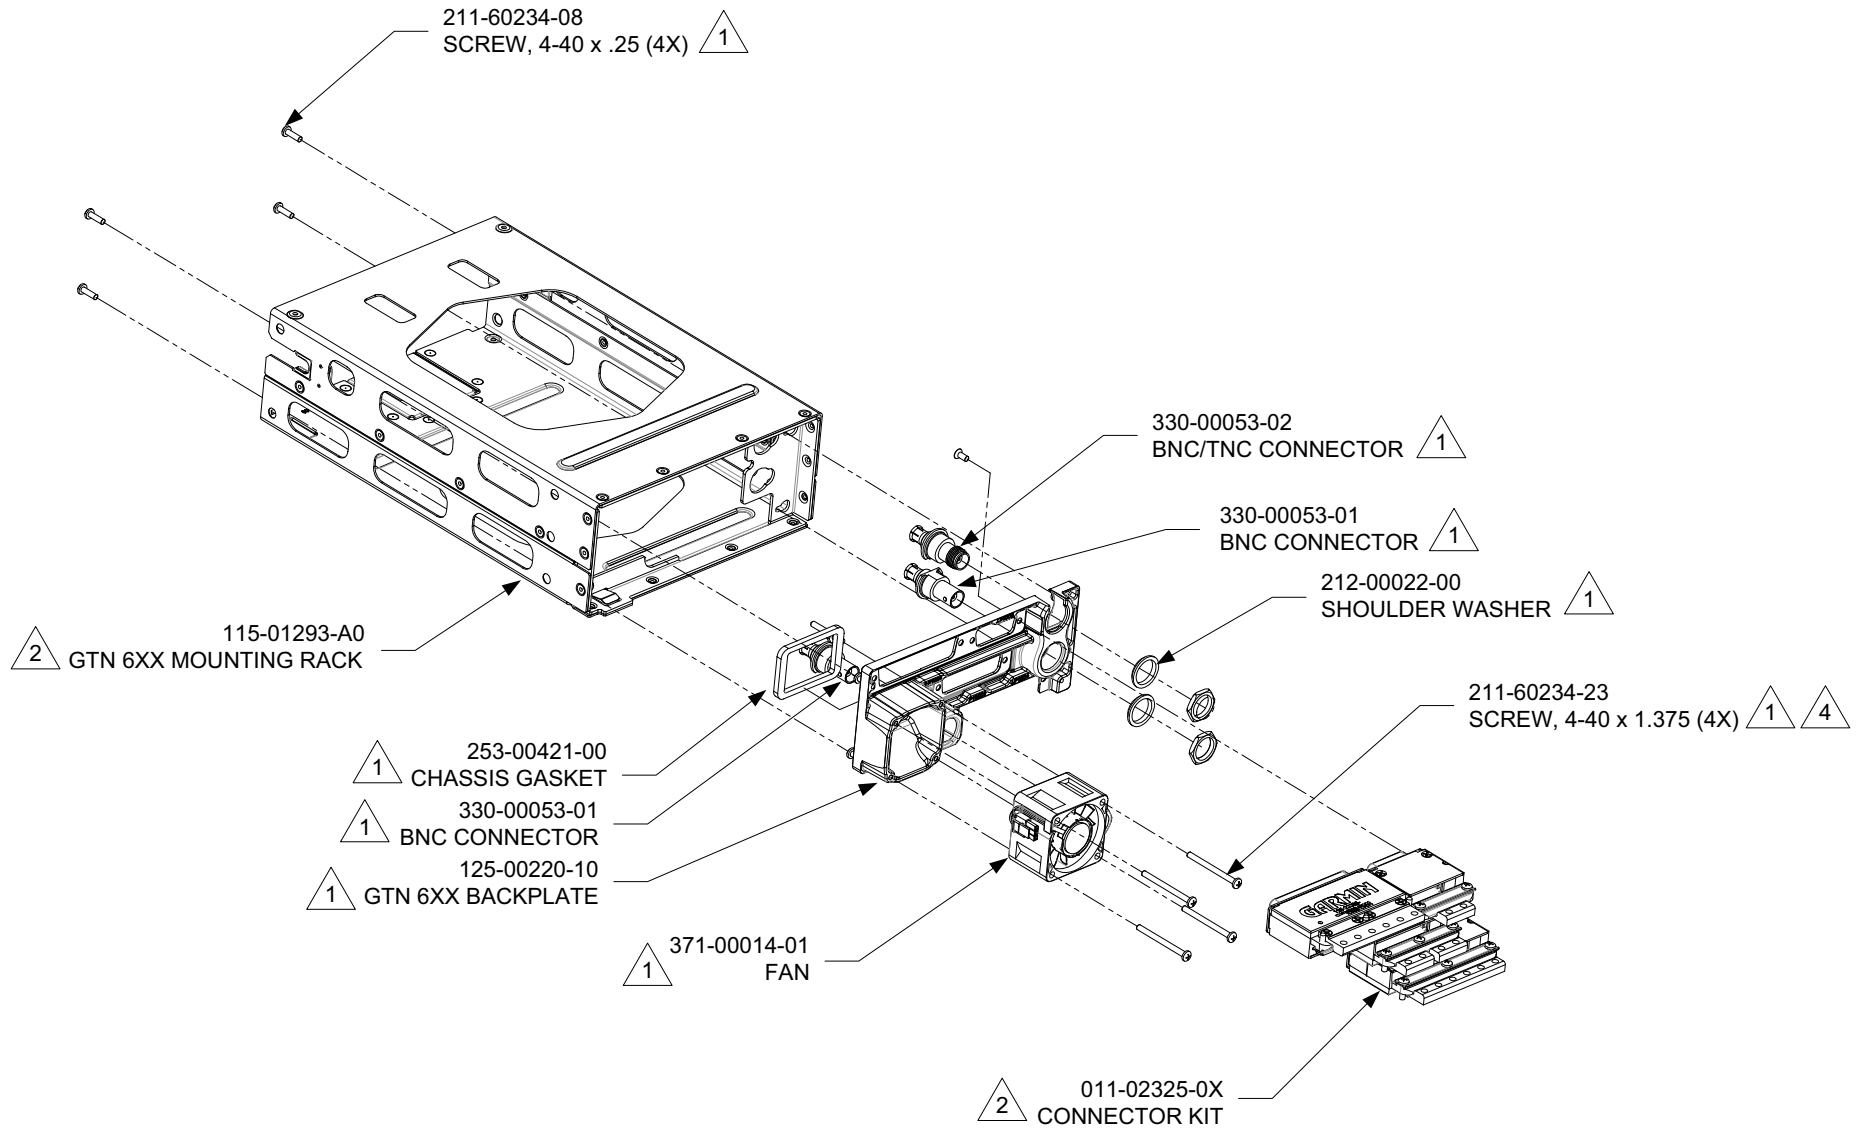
GTN 6XX Mounting Rack Assembly
